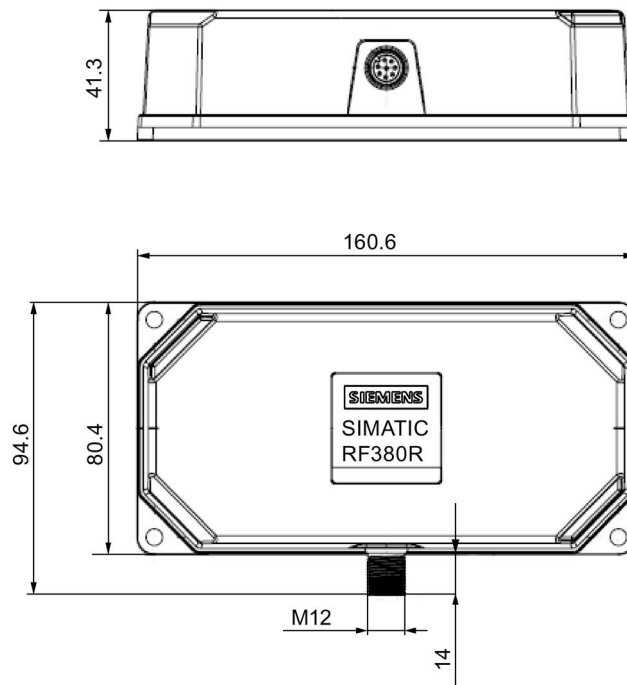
Dimension drawing SIMATIC RF380R - 2nd generation
